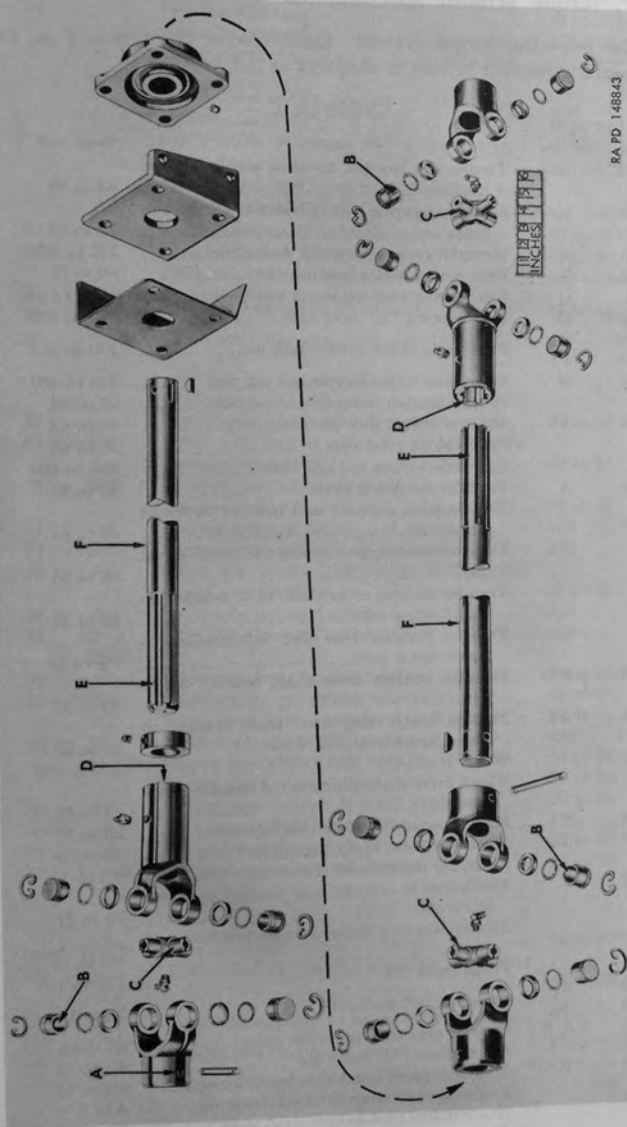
Repair and rebuild standard points of measurement for winch drive line components.
